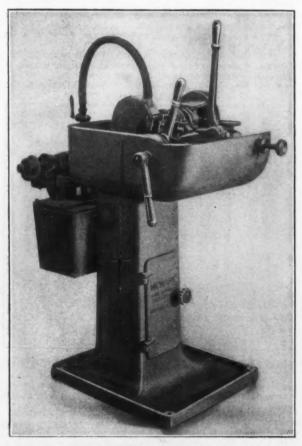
A Gear Cutter Grinder Built by the Newark Gear Cutting Machine Company, Newark, N. J.
